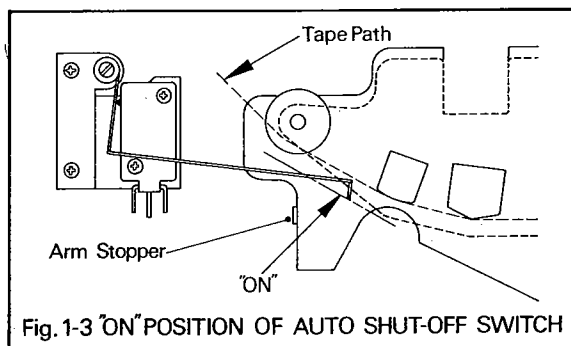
"ON" POSITION OF AUTO SHUT-OFF SWITCH
